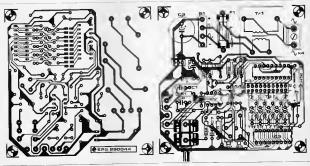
Track layout and component mounting plan. 10.28 elektor indus actober 1989
